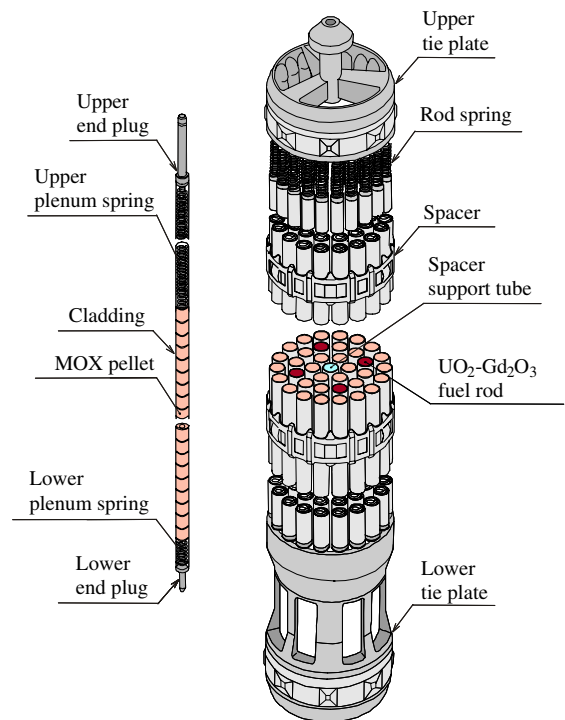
Configuration of FUGEN E09 fuel assembly.
